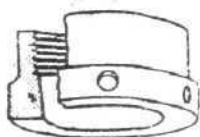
Details of camshaft driving pinion on top end of vertical driving shaft.
